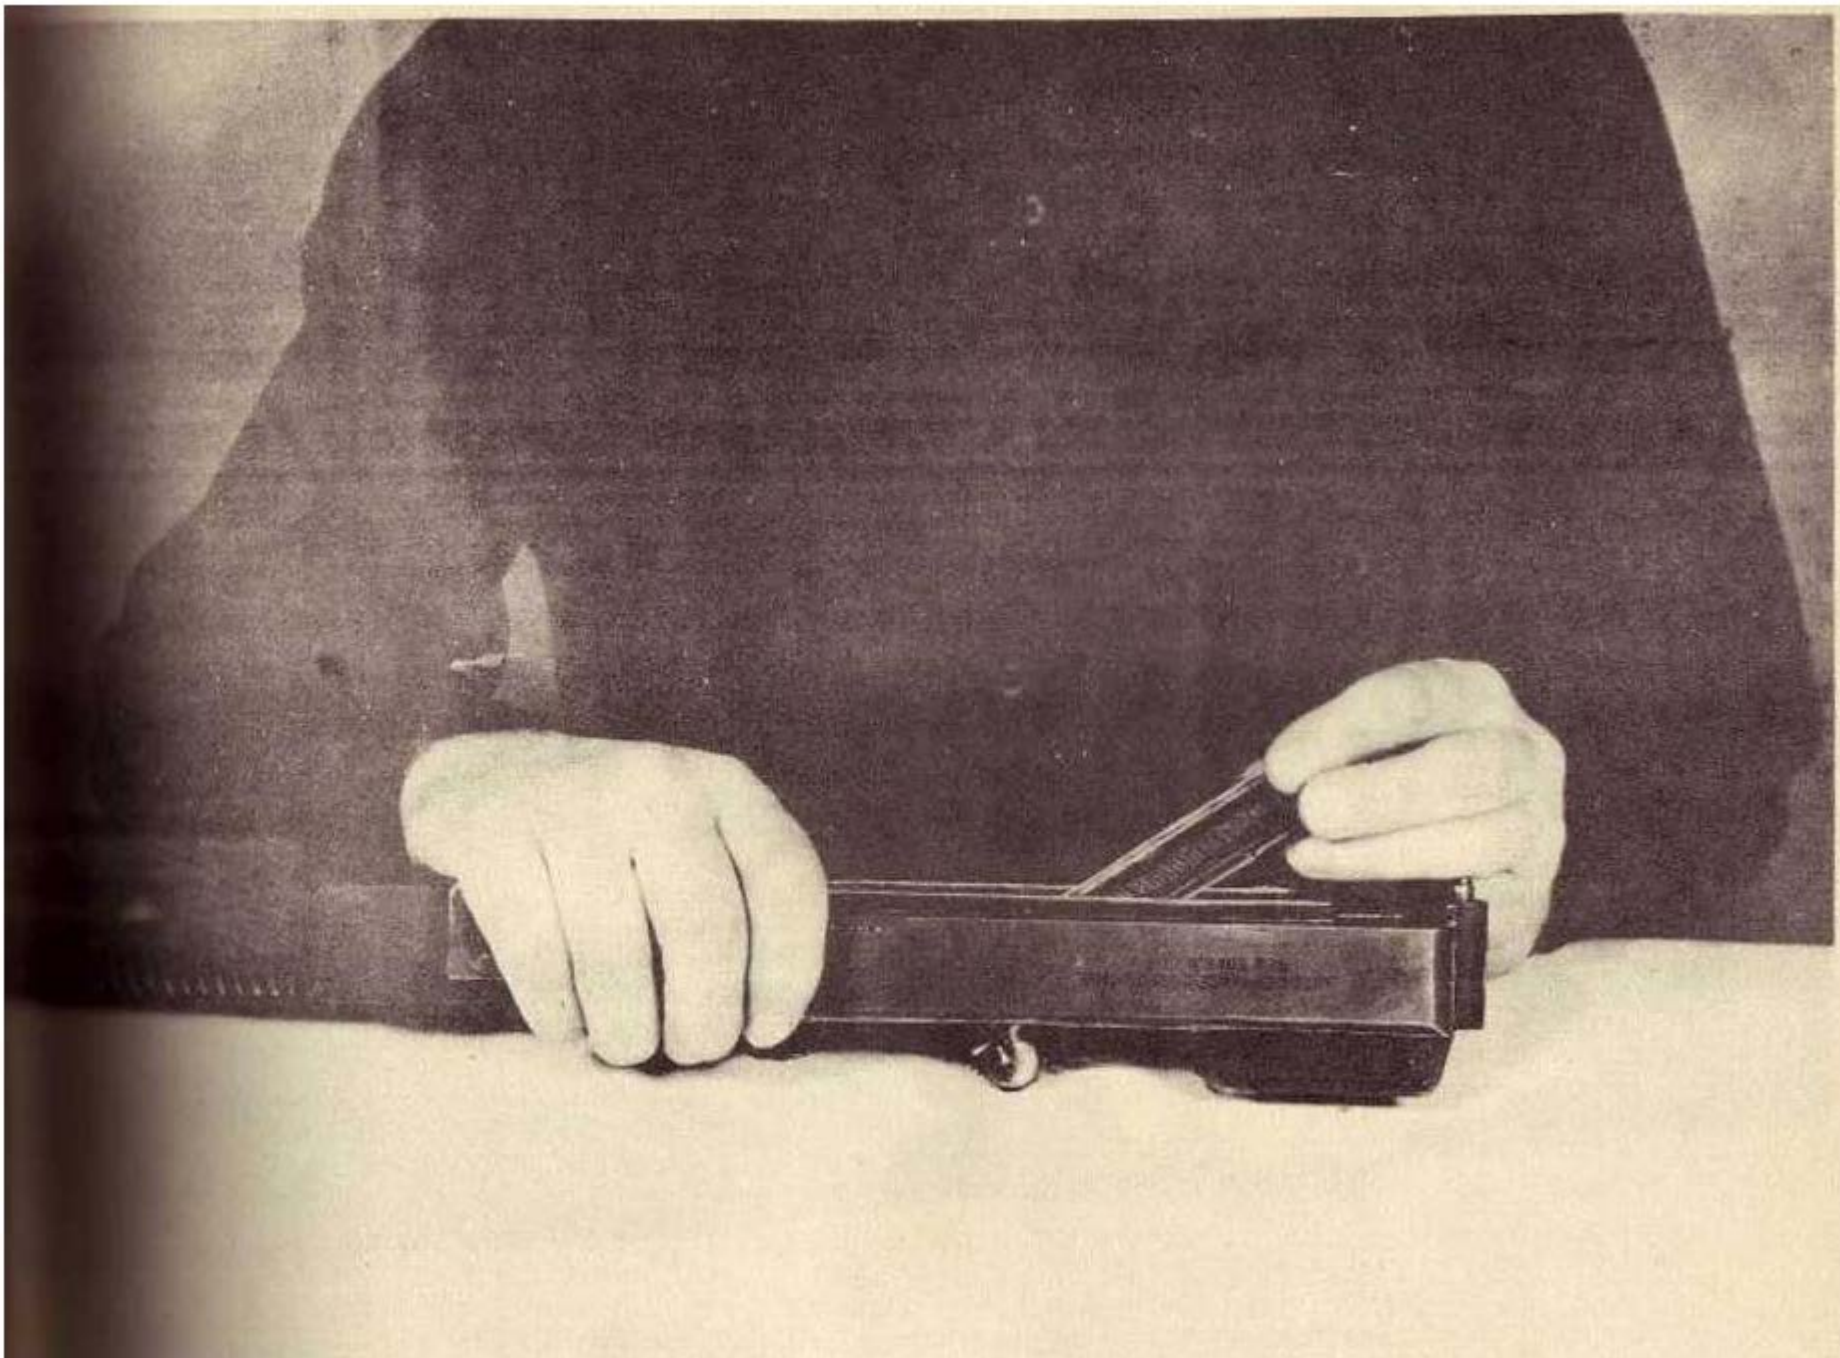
Insert ACTUATOR in RECEIVER, knob to front.
